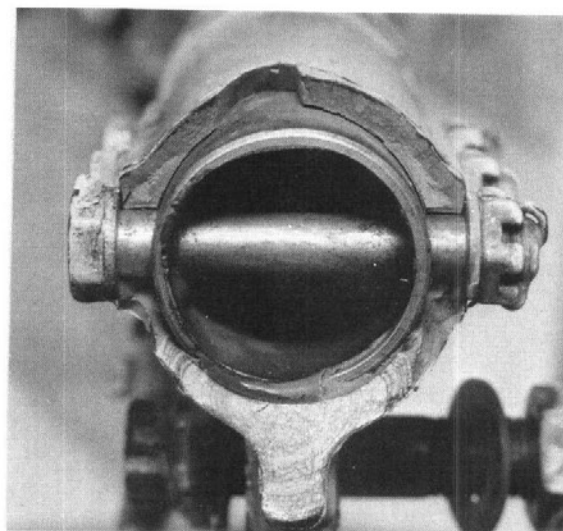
Right hand main landing gear fitting (P/N S6125-50333-2) with the fractures (arrows "a" figure 1) placed relative to each other as if intact. Inboard attachment bolt was removed from the hole.
